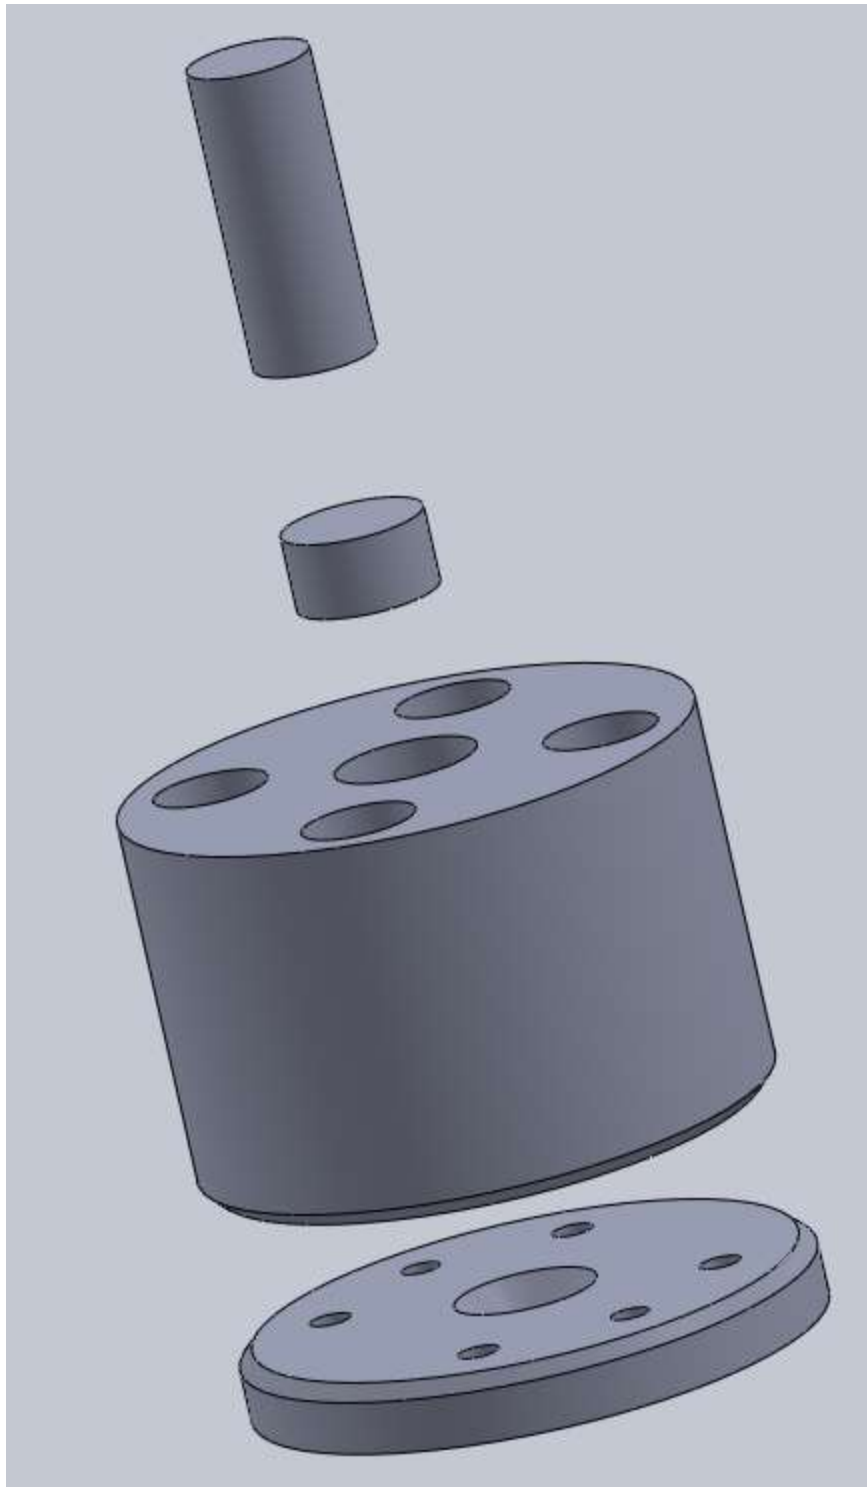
Final rod extrusion tooling design – assembly of parts
